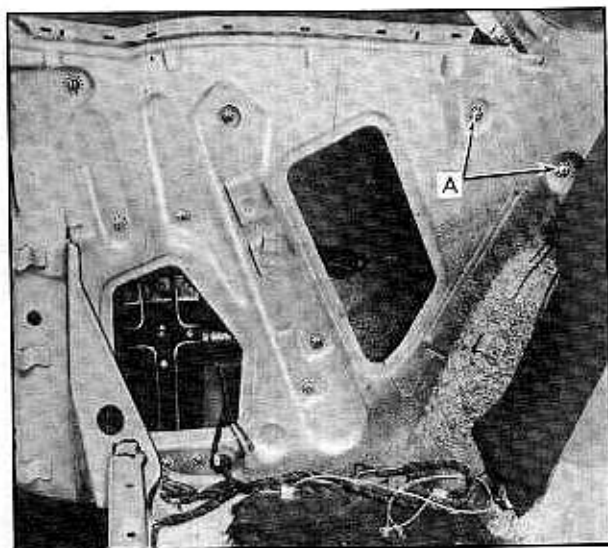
Rear Quarter Window Assembly (6237X)
